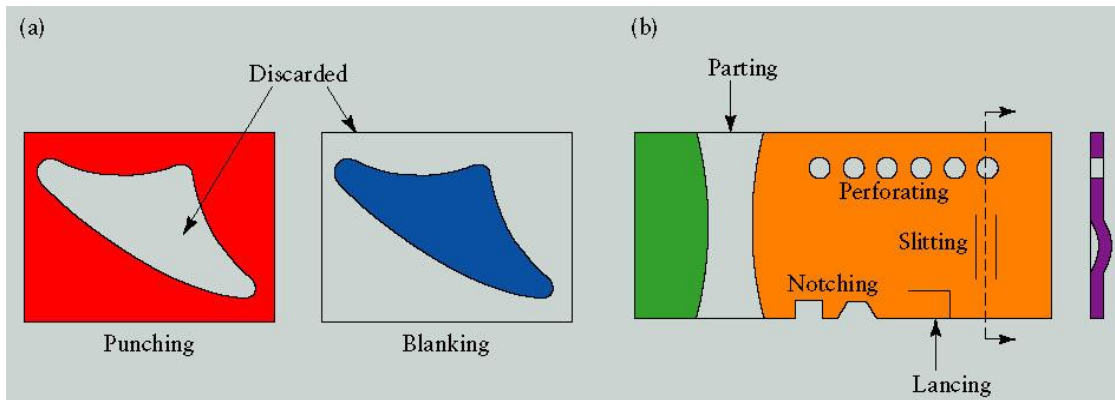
Shearing Operations: Punching, Blanking and Perforating
